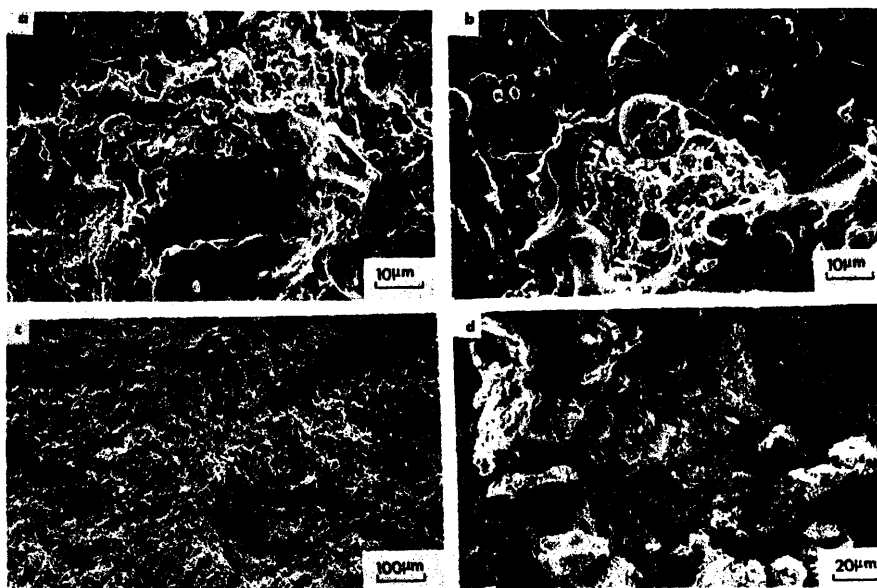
(a) Adhesive fracture surface of YSZ + NiCrAlY coating showing topology complimentary to bond coat surface and showing a lot of cracking; (b) NiCrAlY side of the above fracture showing crack free NiCrAlY matrix with a brittle-fractured YSZ particle embedded in it. (c) Cohesive fracture of the YSZ + NiCrAlY coating showing lamellar tearing; (d) magnified image of a part of Fig. (c) showing the brittle nature of the fracture.
